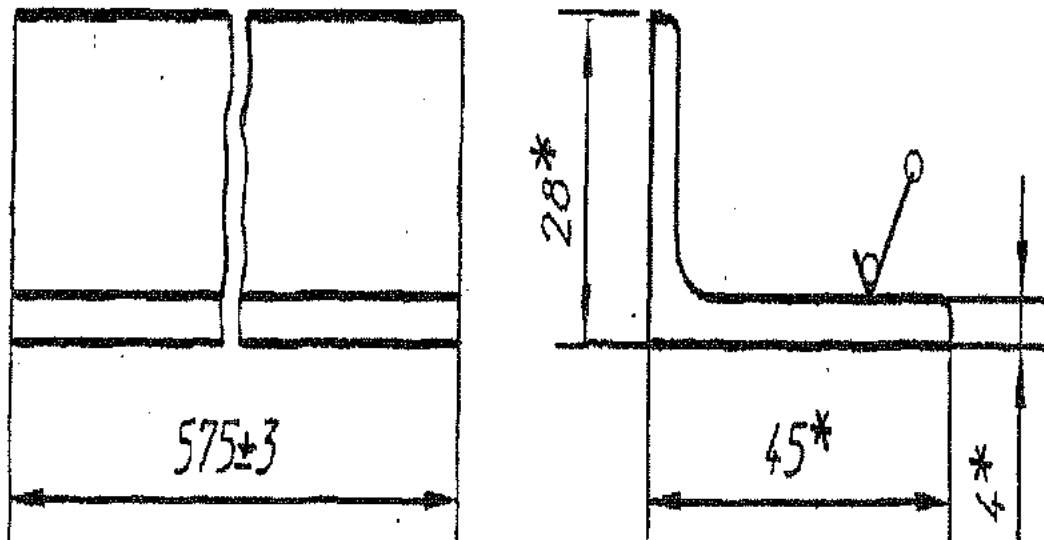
FIG: ANGLE PIECE TO DRG. NO 175.33.050
